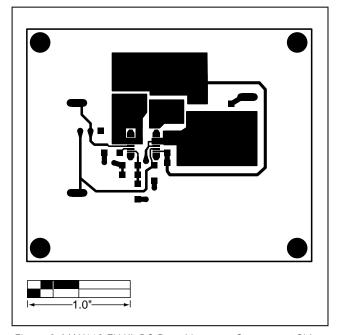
MAX618 EV Kit PC Board Layout—Component Side
